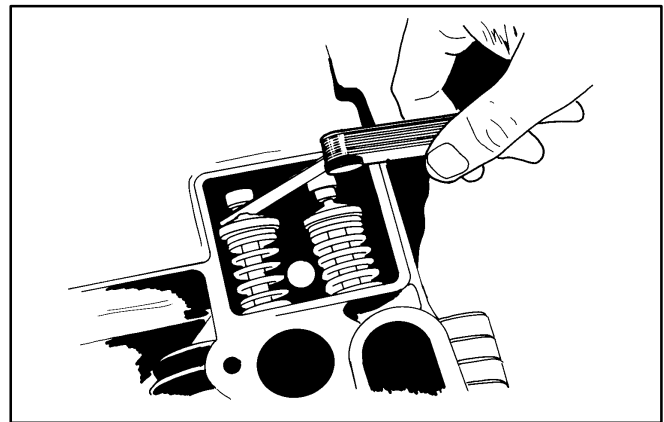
ADJUSTING VALVE CLEARANCE (LASH)
